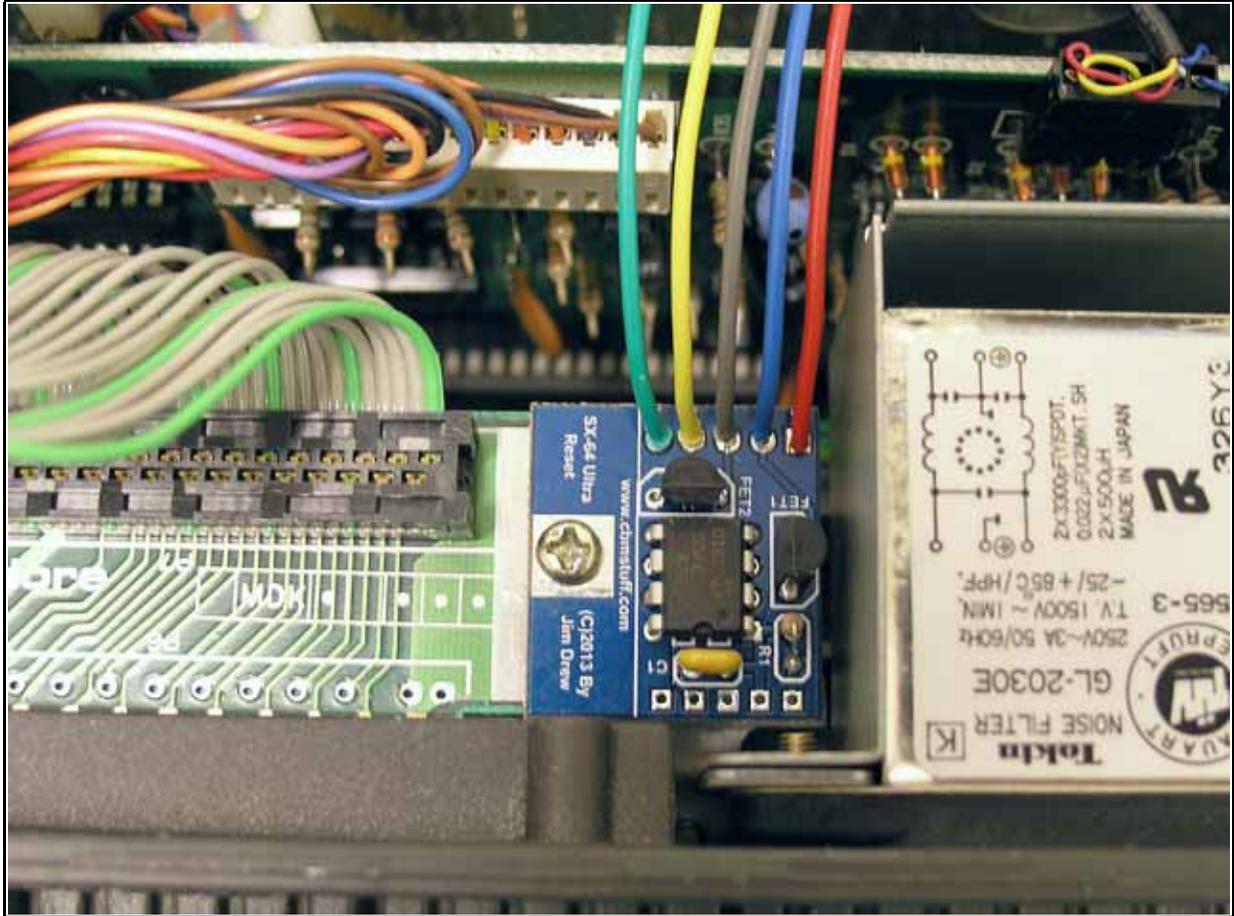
SX-64 Ultra Reset board mounted using original screw
